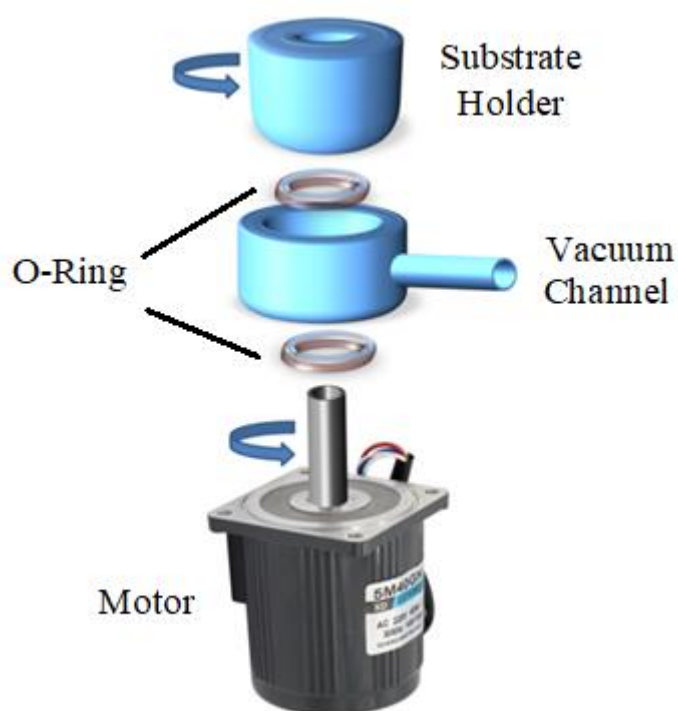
3D design of fabricated spin coater substrate holder, O-ring, vacuum channel and motor.
